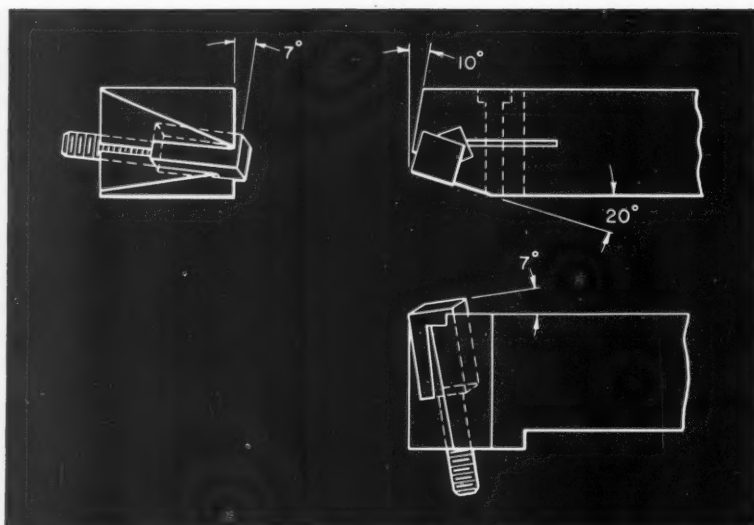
Typical 3/8-inch square carbide tool bit and holder employed in making hot-spot machining tests
